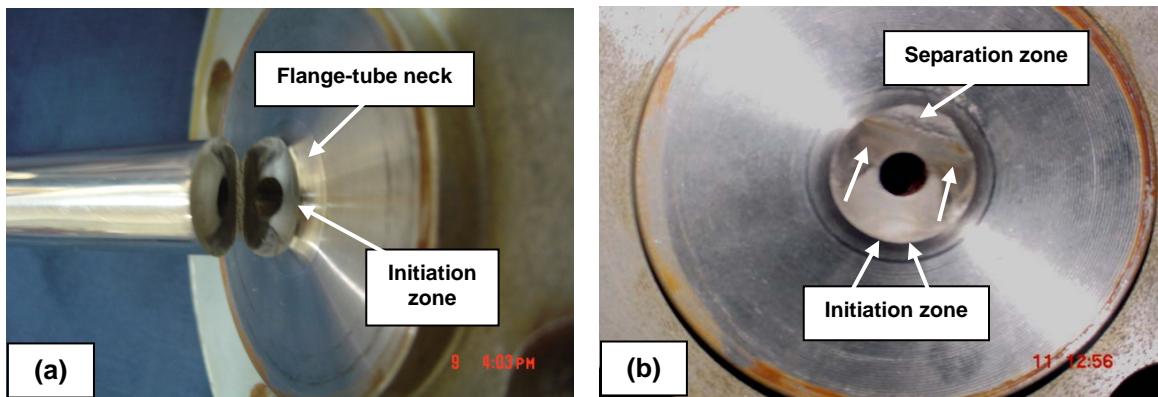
Enlarged views of cracked thermowell during (a) and after (b) separation of the remainder of its circumference. Crack initiation zone is highlighted with arrows.
